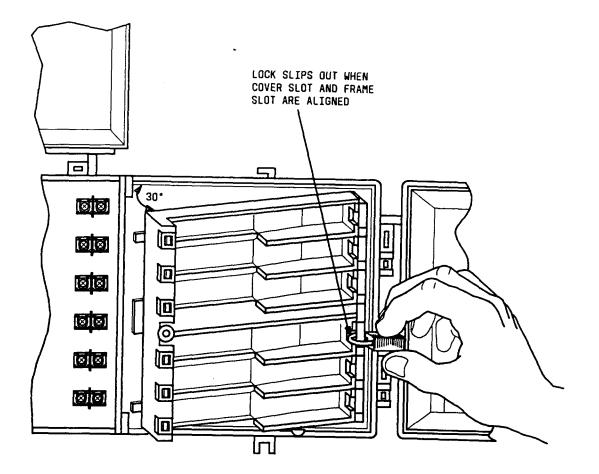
Aligning Frame Slot With Edge of Cover for Lock Removal
